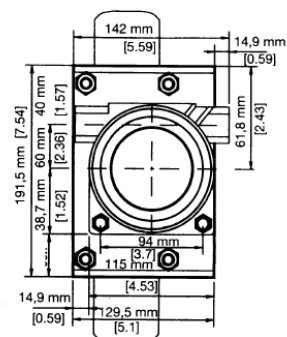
STT350 Transmitter and Optional Flameproof Housing Dimensions –reference only – mm (inches)
